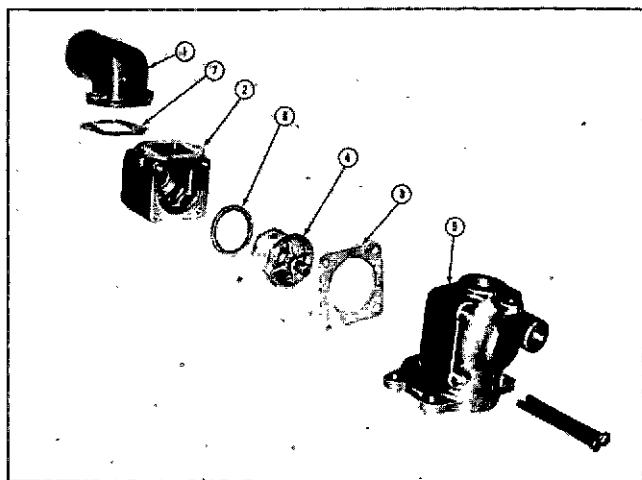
, V40814. Thermostat housing and seal—exploded view
